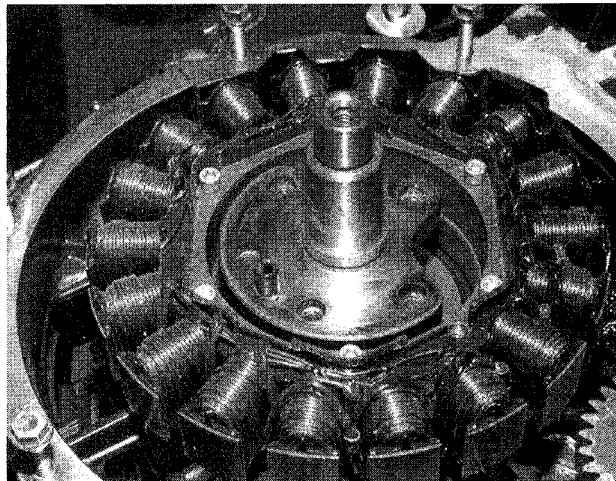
All Evinrude/Johnson V motors are equipped with a 1-piece stator whose windings incorporate the battery charge or AC lighting coil and ignition charge coils (or only the battery charge coils on FFI motors)
